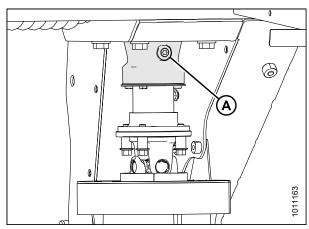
Mower Conditioner Drive Gearbox Drain Plug
